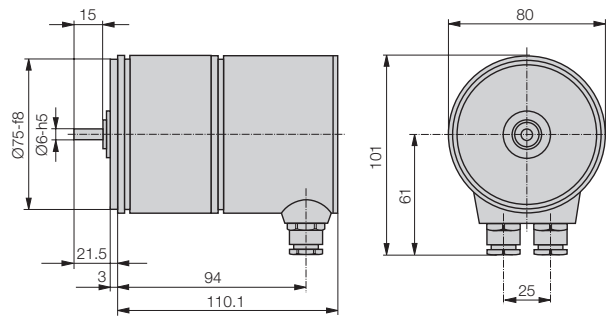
Basic unit with additional gear (fixation see Fig. 12).
